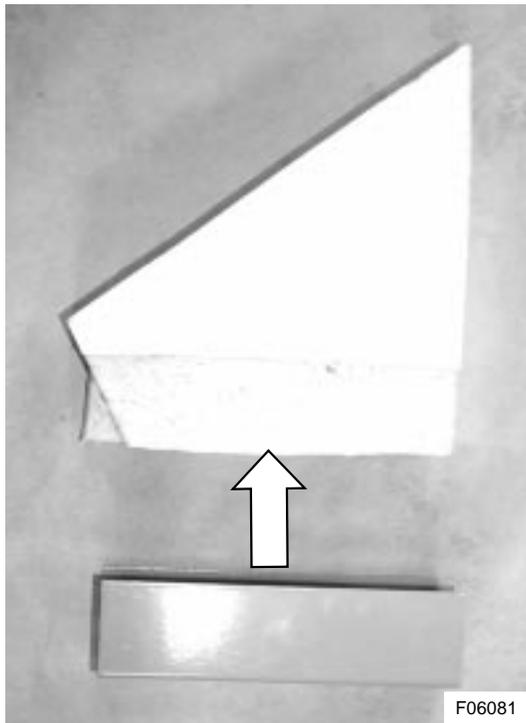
Machine screw retaining channel glued to insulation panel VH 10785621
